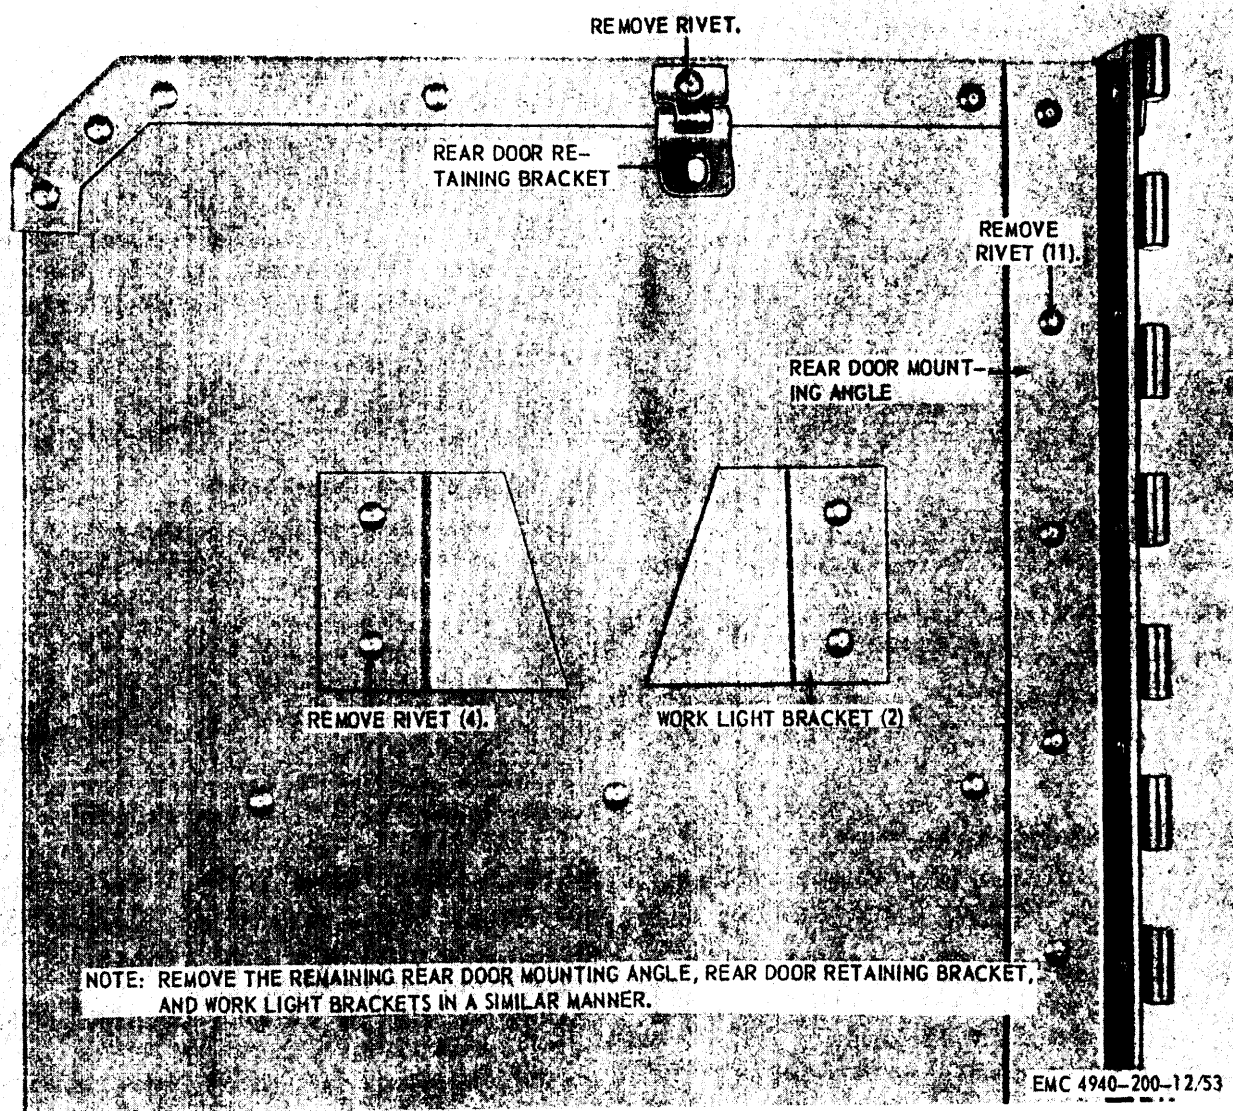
Rear door mounting angle, rear door retaining bracket, and worklight brackets, removal and installation.
